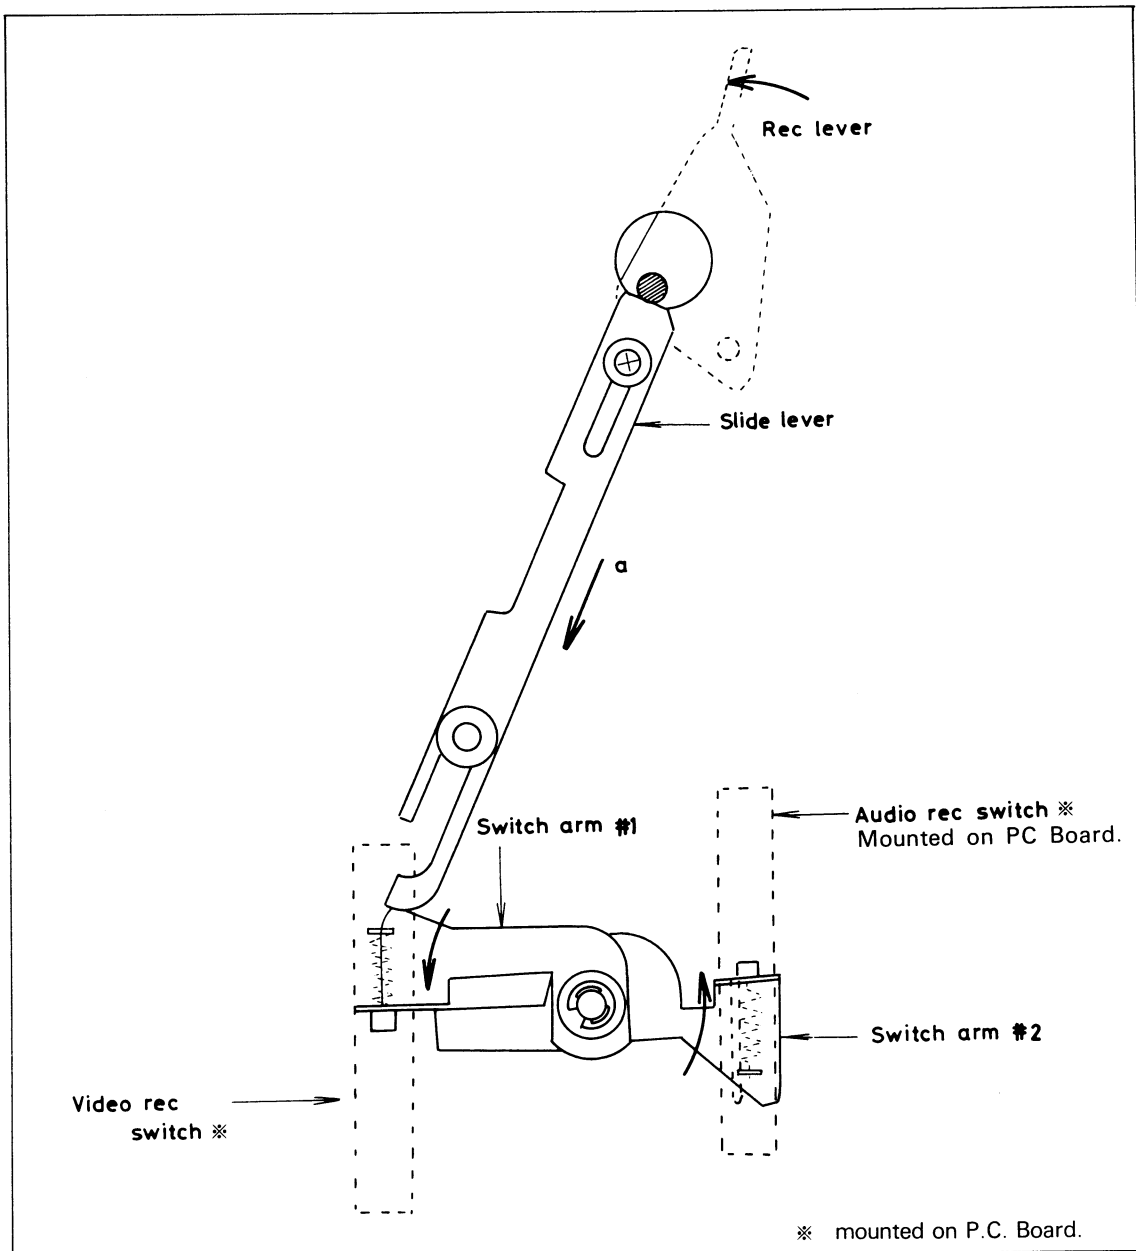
Record mode mechanism (BOTTOM VIEW)
